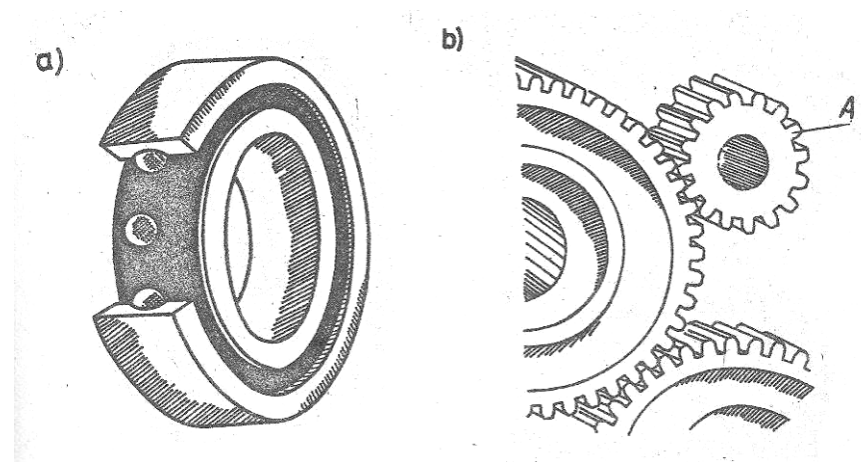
Examples of machine element lubrication with solid lubricants a/ working layers of rolling bearing; b/ working layers of gear teeth [9]
